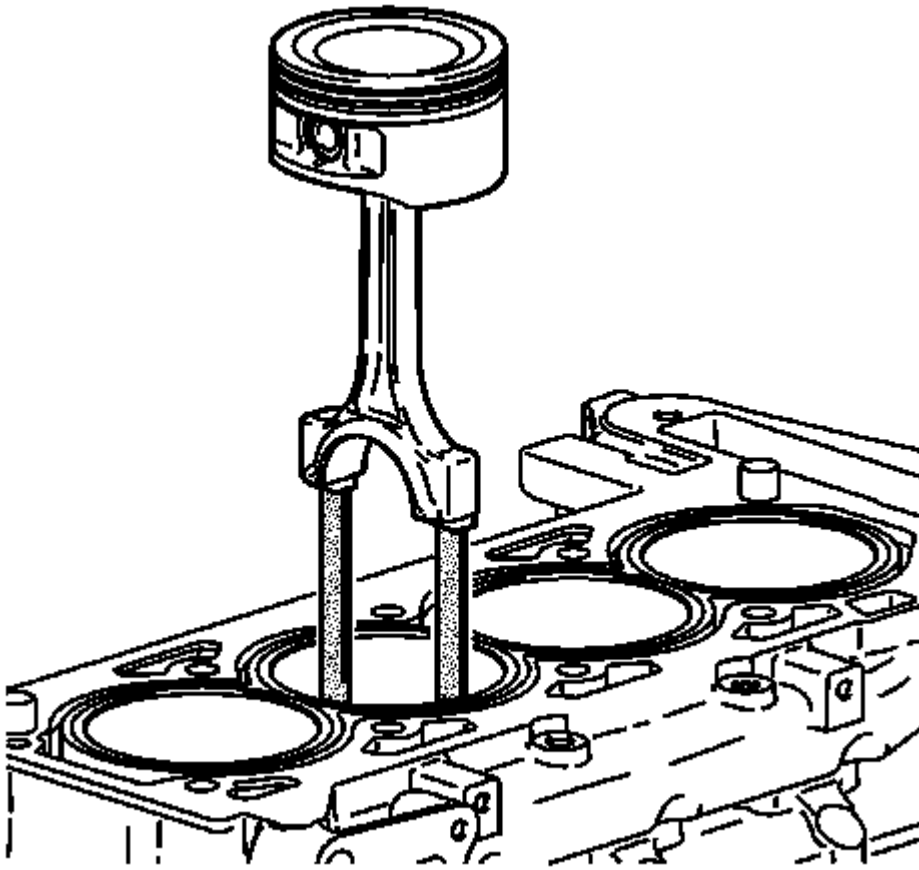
J-43966-1 Installed Into Connecting Rod Bolt Holes
